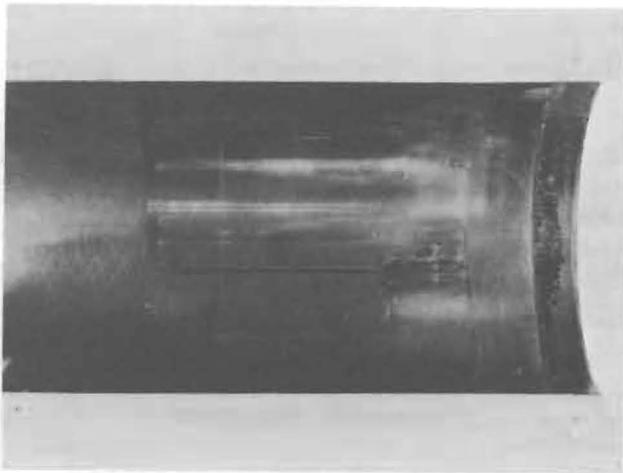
Cylinder liner wear on the major thrust side after 245 hours of engine operation with a 50/50 sunflower oil/diesel fuel mixture.
